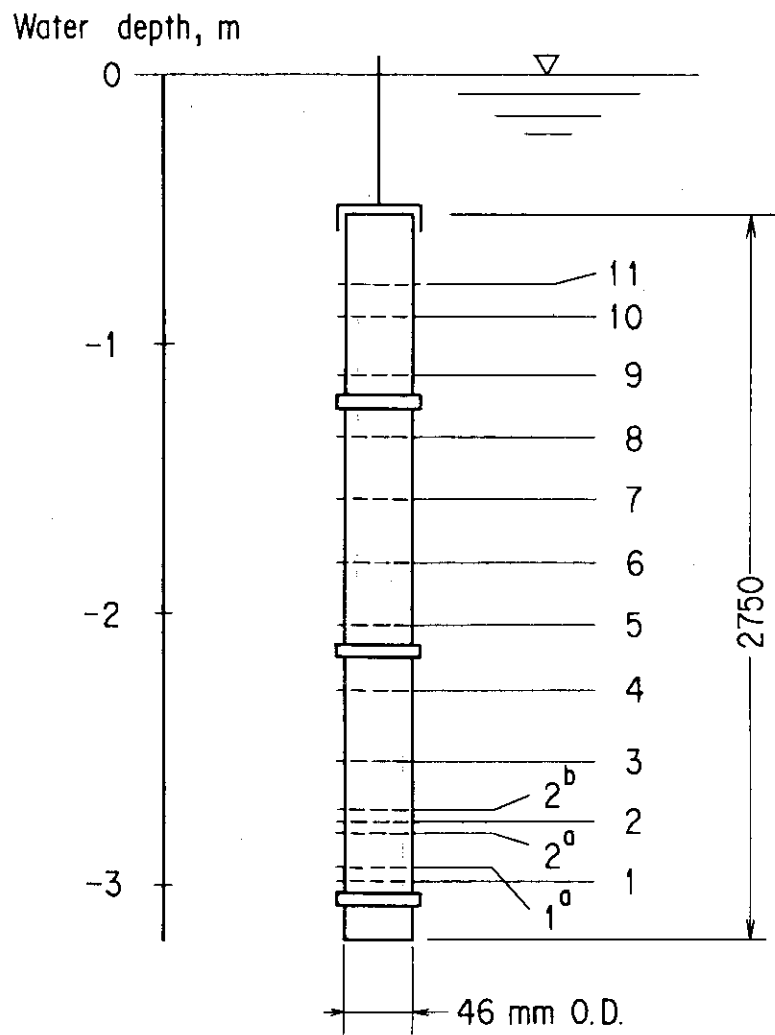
Cutting Locations in the Upper Half of the Partition Tube
